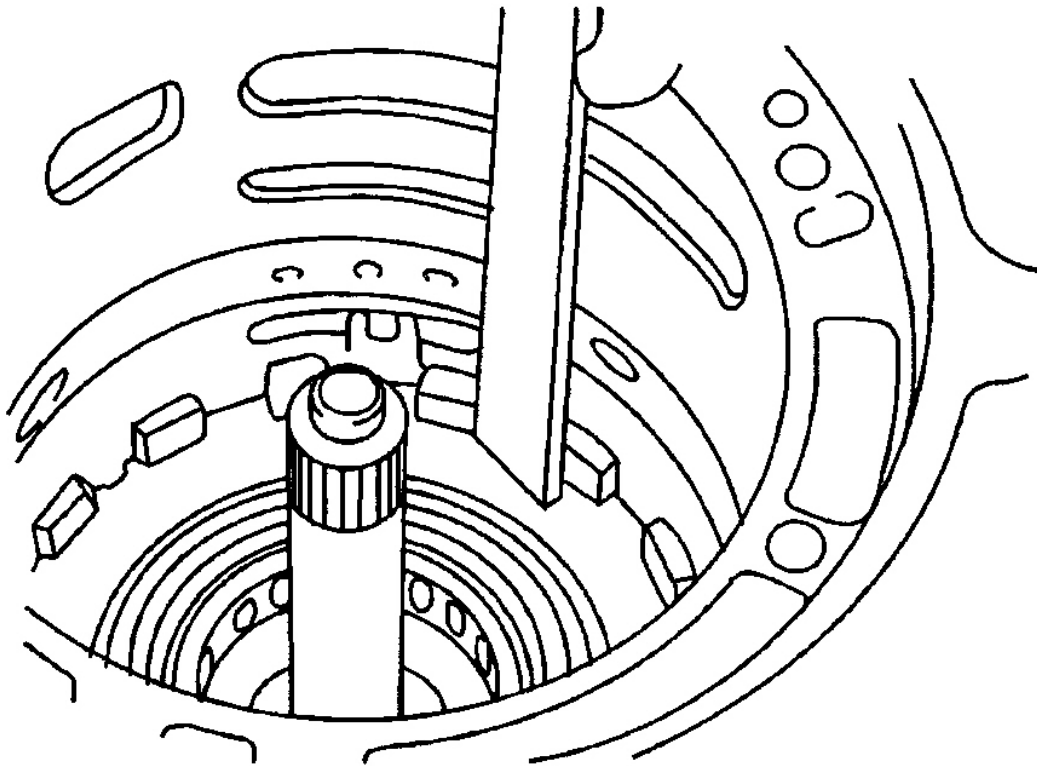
Installing Output Shaft Thrust Bearing & Race
